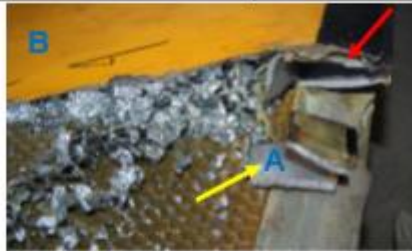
Main Spar fracture surfaces, Blades A and B (digital)
